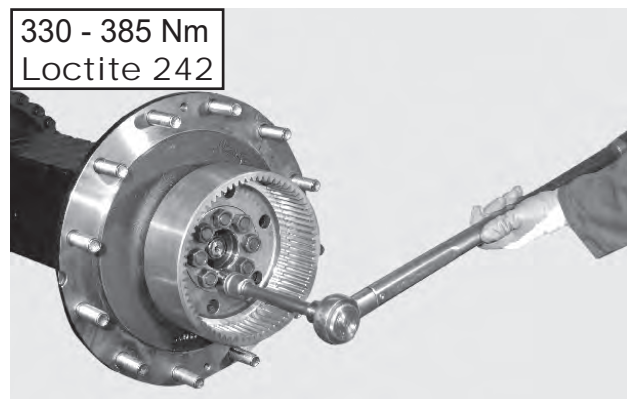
Coat the nuts (7) with Loctite 242 and tighten them. Tighten nuts (7) in two stages, using the criss-cross method. Initial torque wrench setting: 330 N·m. Final torque wrench setting: 385 N·m.
